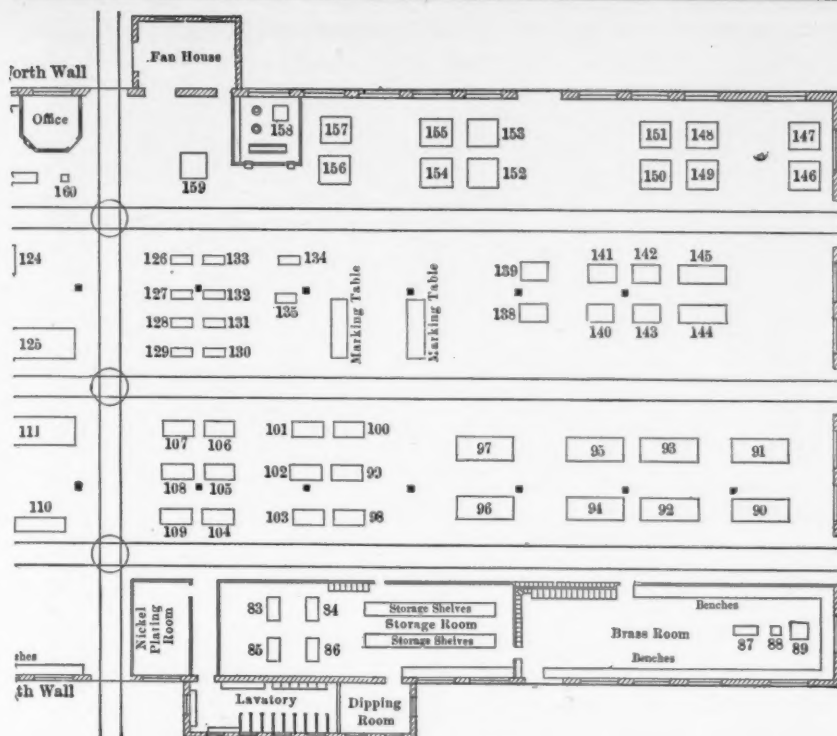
PARTIAL PLAN OF THE CAR MACHINE SHOP.
